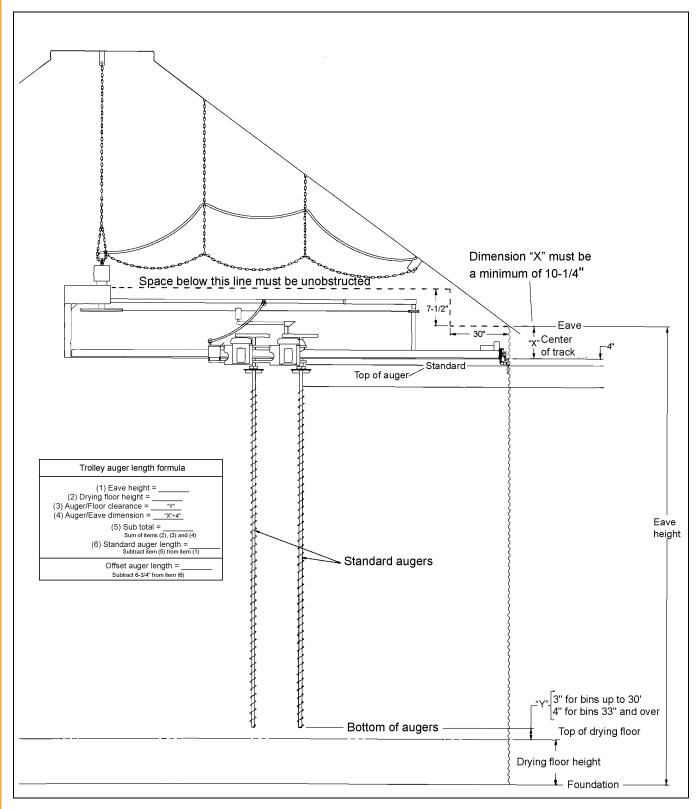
AT Design III Stir-Ator - Overall Size and Dimensions
